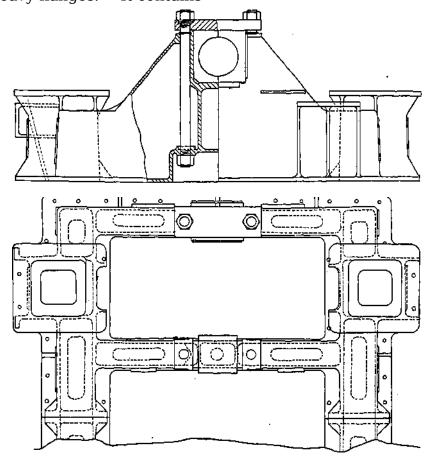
Marine-engine Bedplate showing Sectional View of Main Bearing
